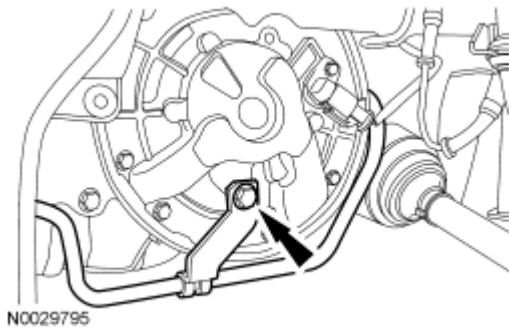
Locating Transmission Fluid Cooler Tube Bracket Bolt
